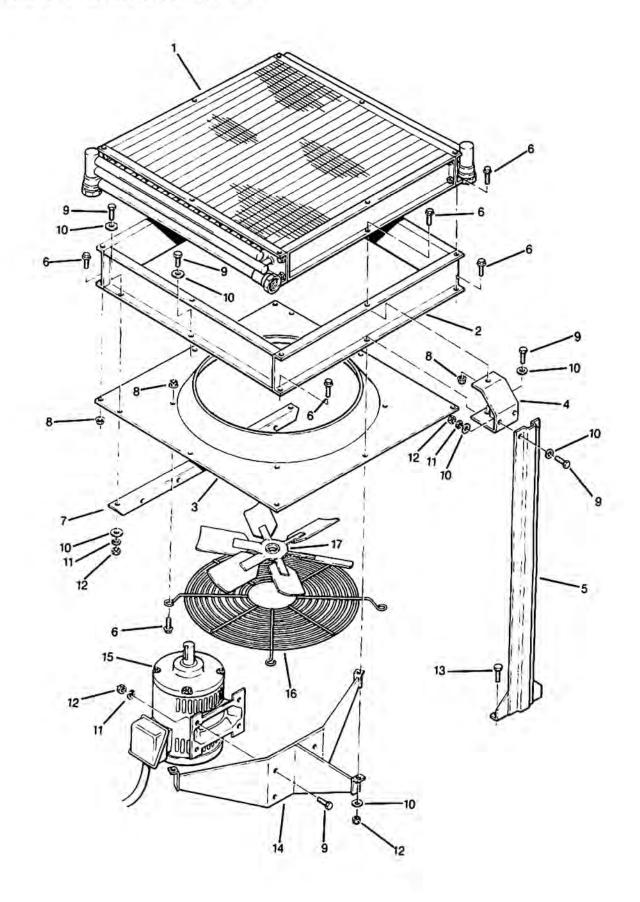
COMPRESSOR COOLING AND LUBRICATION SYSTEM - AIR COOLED
